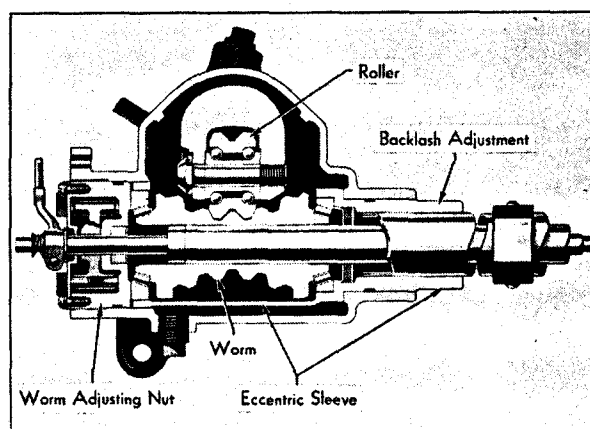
Sectional view of inverted type steering gear used on the 355-D Fleetwood, the 370-D and the 452-D cars
